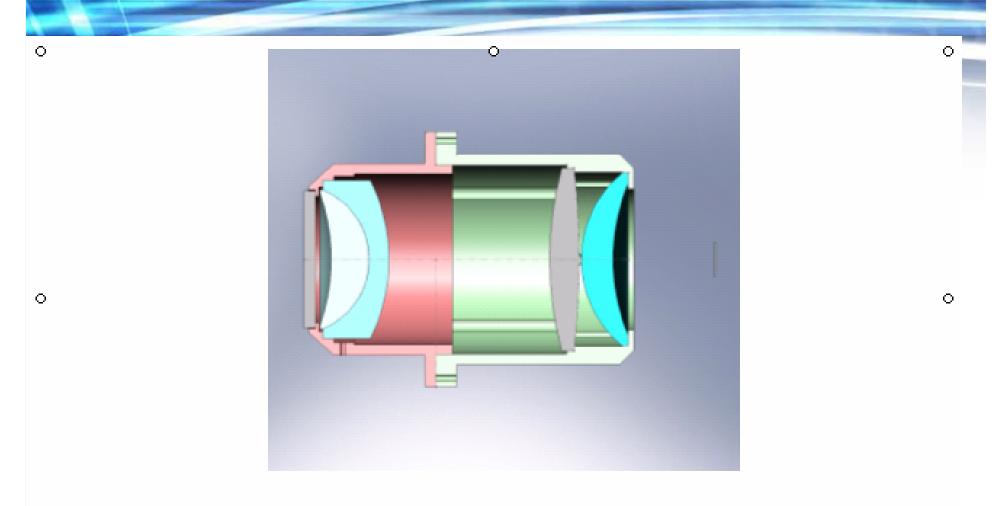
A lens housing assembly design based on the optical components imported from ZEMAX.  $_{\odot}$
